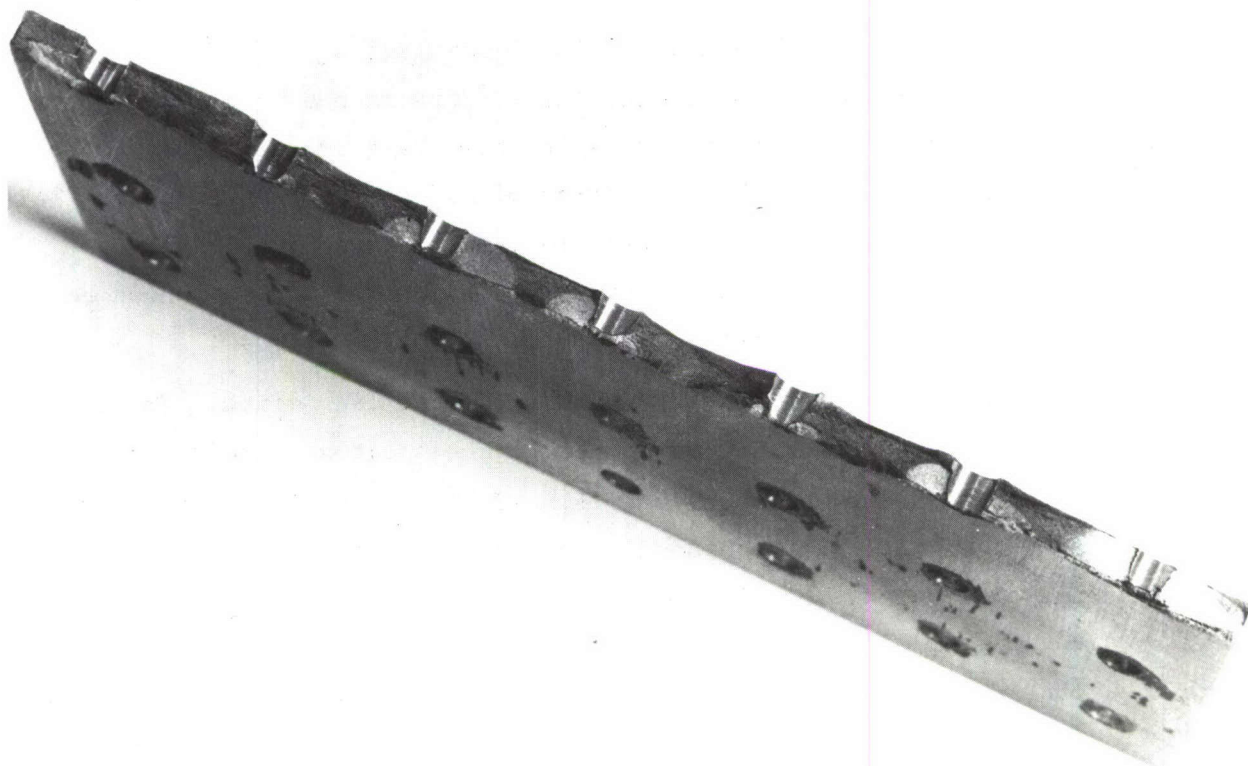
Two Fretting Cracks at Each Hole in the Fracture Surface of the Doubler of Specimen 4.7-10.
